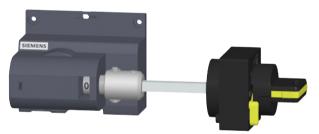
Lateral rotary operating mechanism with extension shaft, coupling driver and knob
